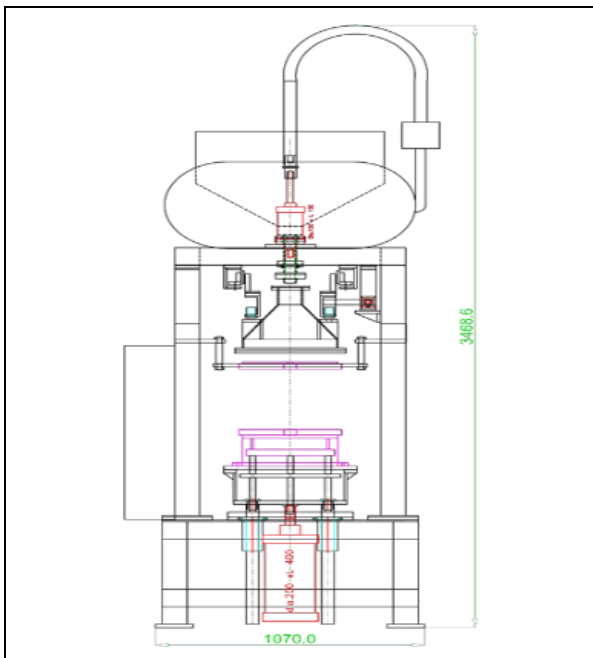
Completed 2D technical design of the horizontal shell core casting machine from side view.
